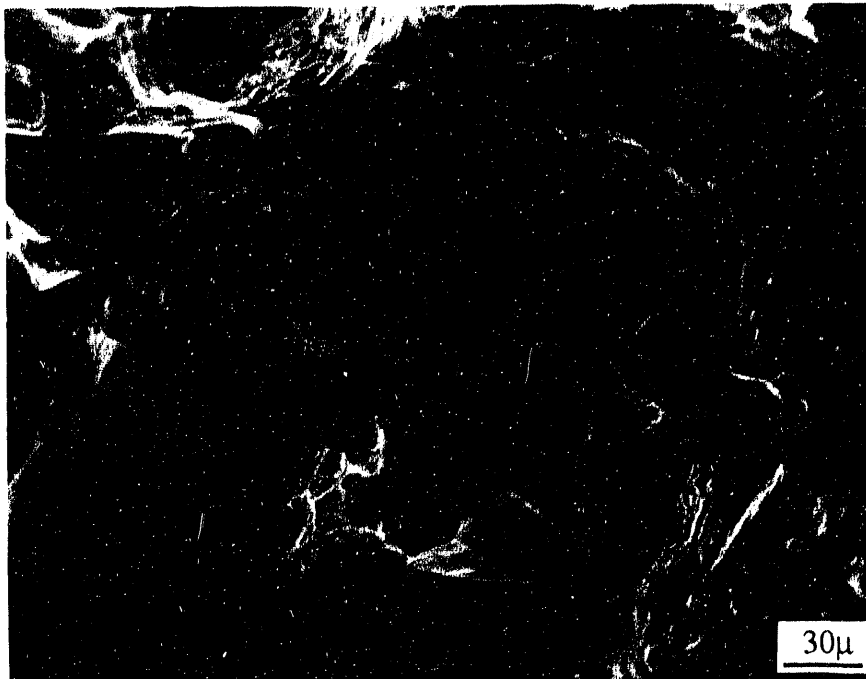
Fracture surface morphology of Inconel 617 hot ductility sample tested for on-heating at 1010°C.
